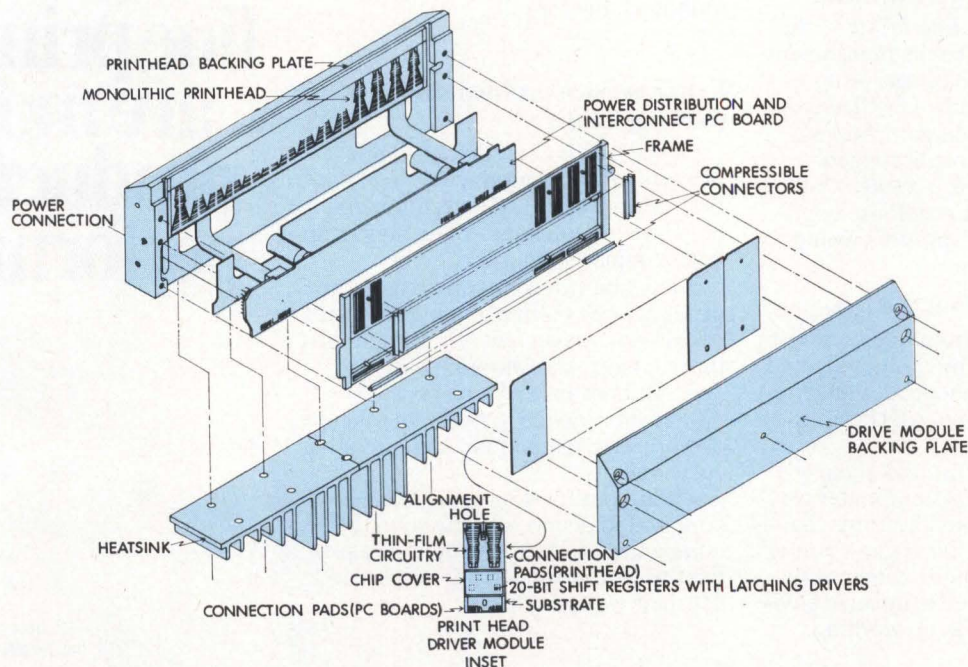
Exploded view of thermal printhead assembly. Each of seven printhead driver modules contains four 20-bit shift registers with latching print resistor drivers. These modules connect to monolithic printhead using compressible elastomeric connectors. Power and burn information come through single connector cable onto printed circuit board, which also connects to printhead with conductive elastomeric connectors. Two rigid backing plates hold entire printhead assembly together
